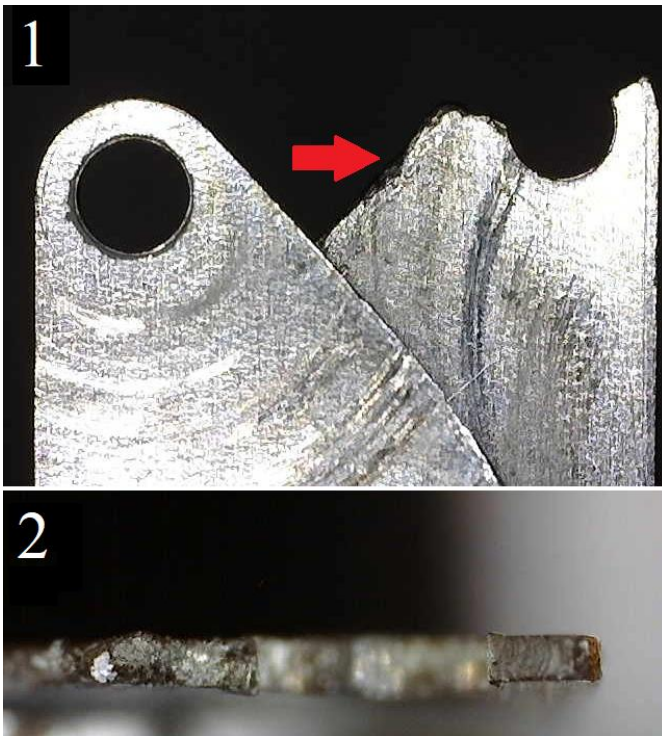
A side and a top view of the fracture site of the leaf spring. 1) The damage to the side of the leaf spring, which weakened the pin hole, is indicated by the red arrow. 2) The surfaces left and right of the pin hole indicate ductile and brittle fractures, meaning the cracks propagated from left to right.
